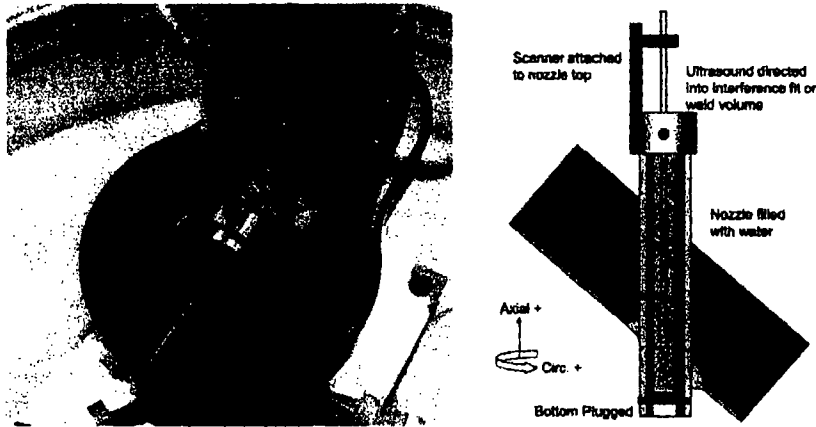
Left: Scanner on calibration specimen. Right: Inspection schematic.
